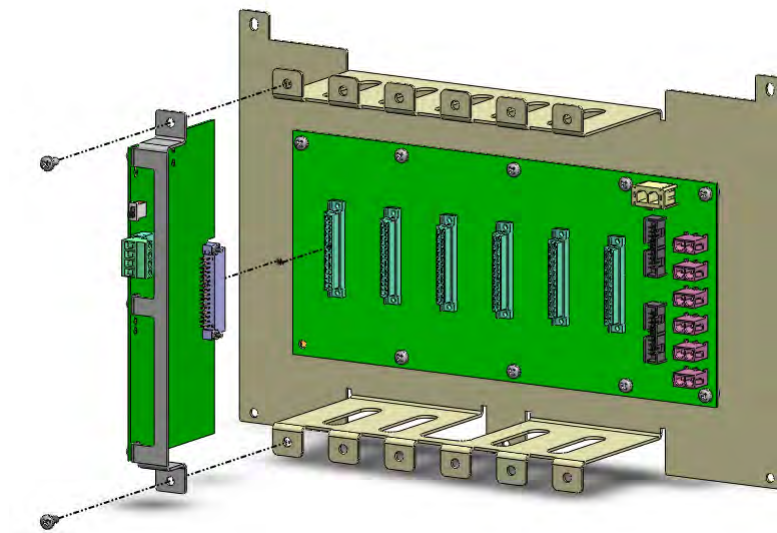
Inserting an Expansion Card into Card Cage Slot
